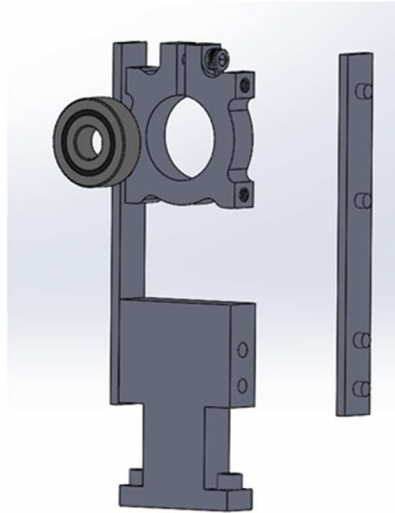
11: An exploded view of a motor shaft supporting the bearing mount.
